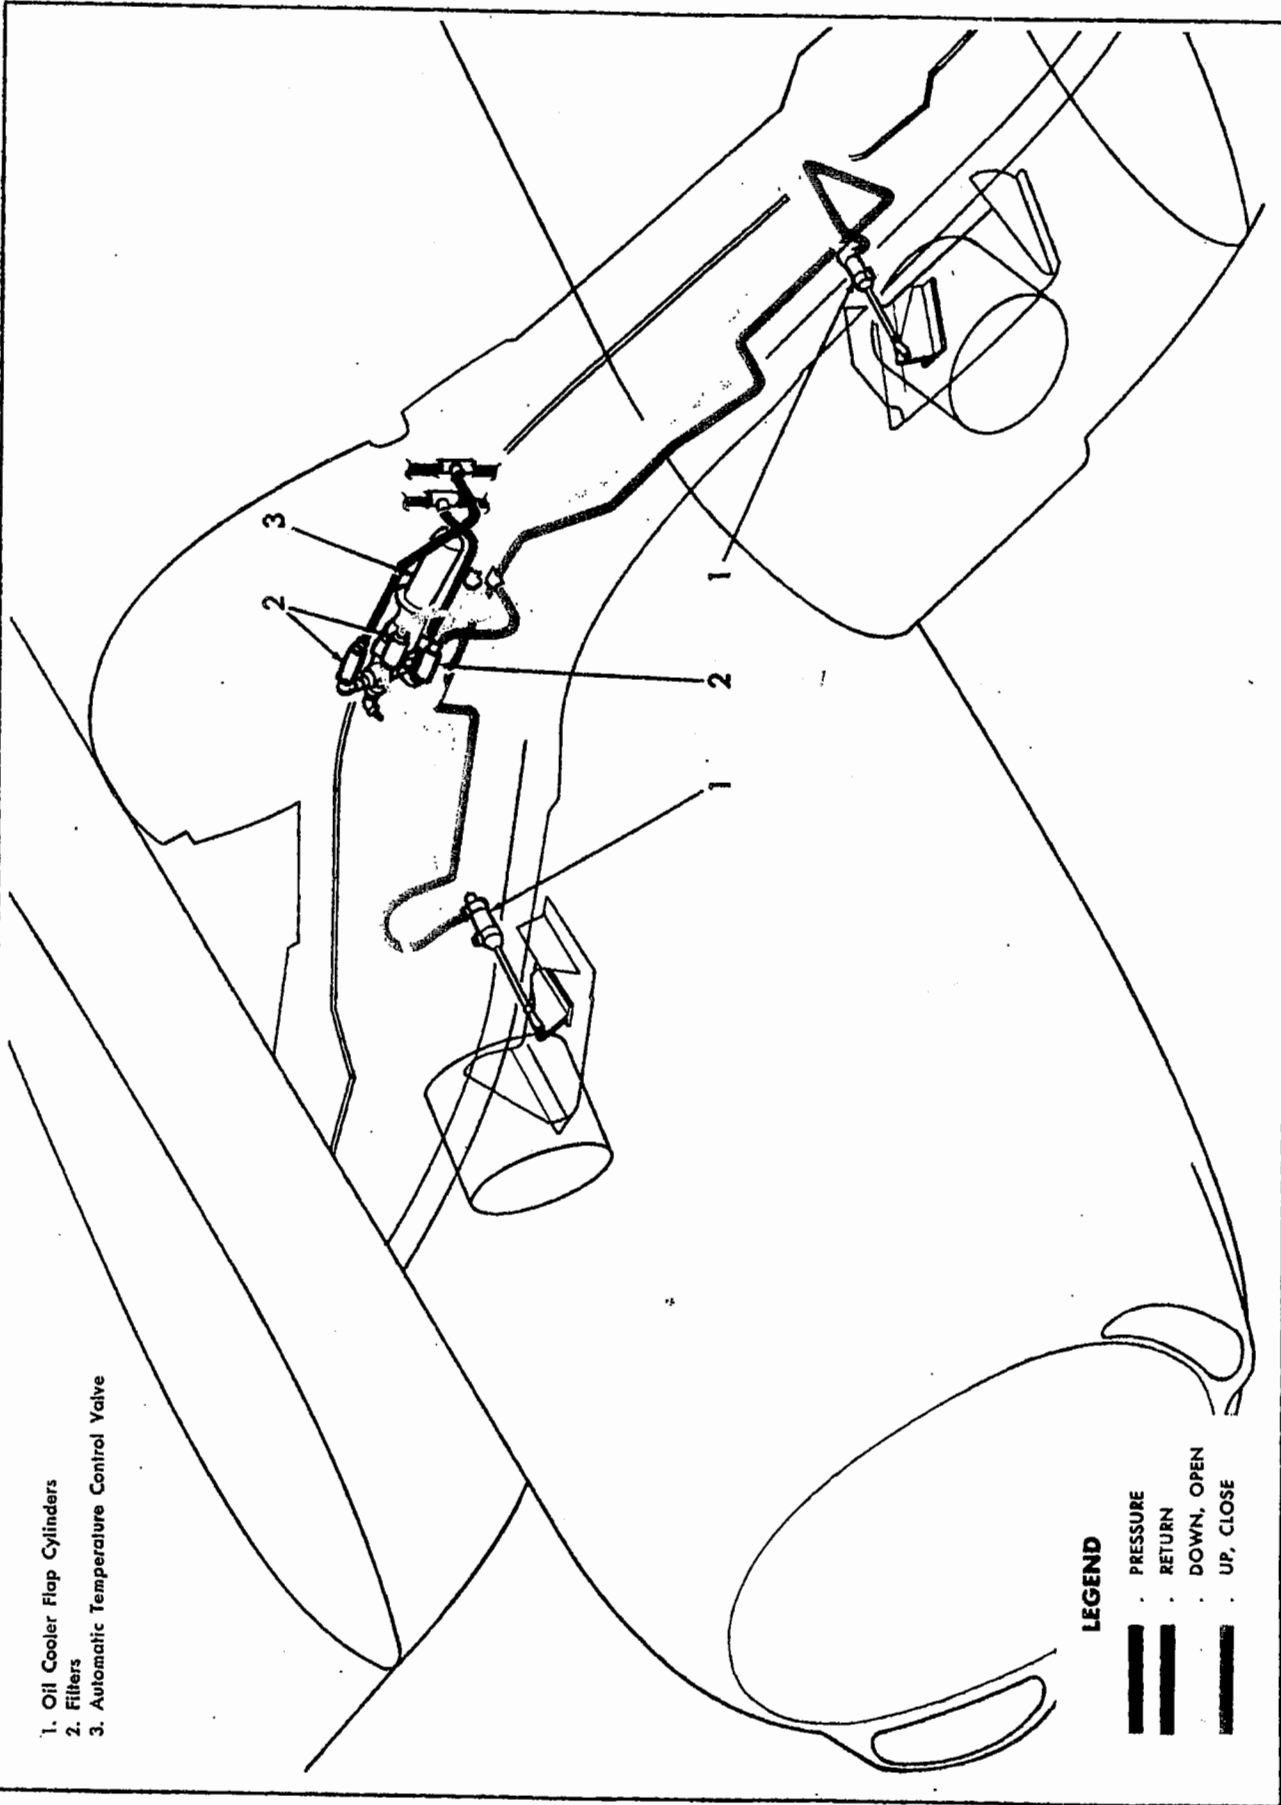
Hydraulic System—Oil Cooler Doors.
